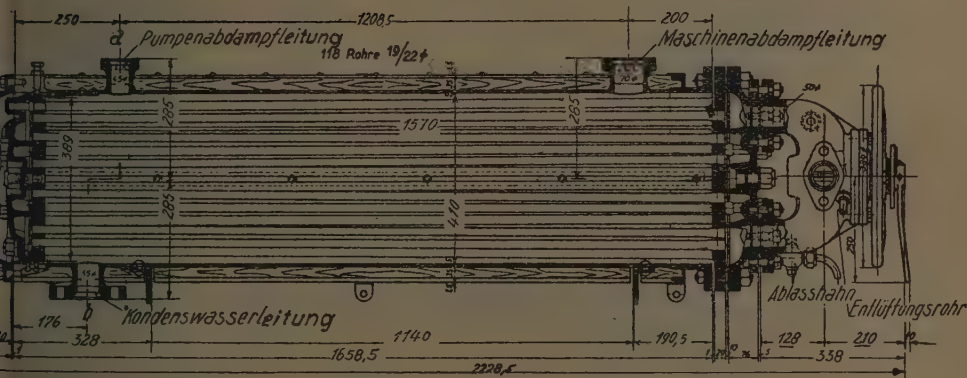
Knorr exhaust steam preheater with straight tubes.
